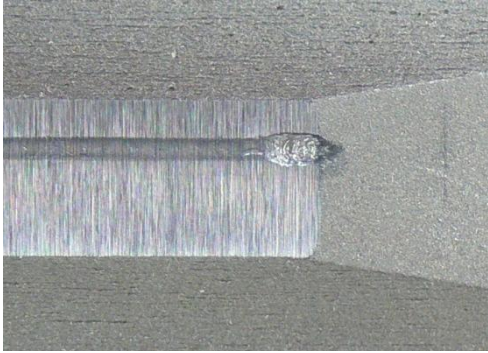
Flaking of outer sleeve raceway surface of linear bush with ball retainer (edge)
